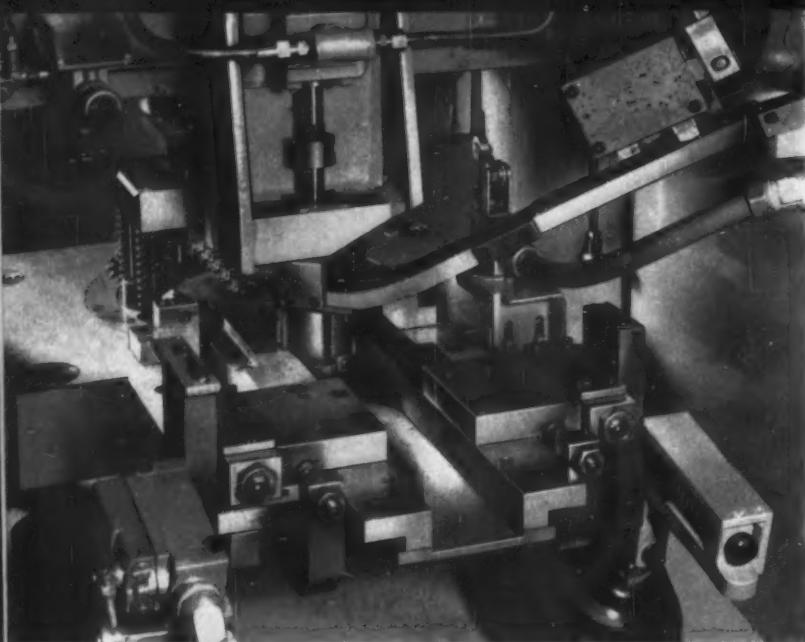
Automatic devices on this universal press feed the sintered parts for sizing and coining. A vibrating hopper first orients and then loads the gears into a magazine which delivers them singly to a contoured recess in a shuttle feeding the die.
